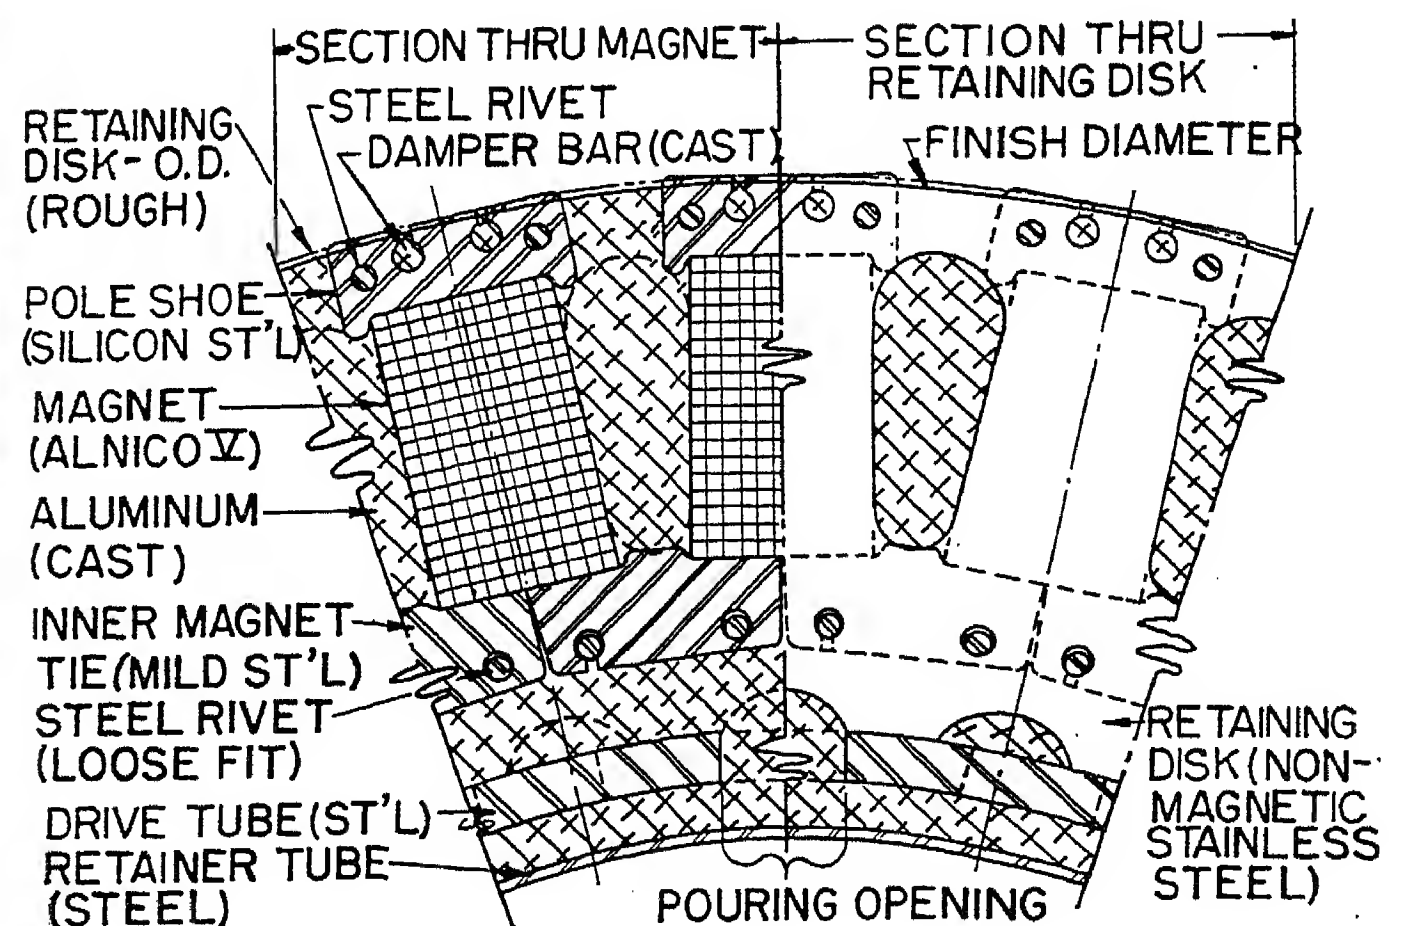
75-kva 28-pole 400-cycle rotor section showing details of the magnet assembly and drive tube illustrated in Figure 3
